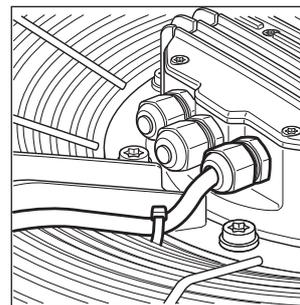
Fan installed lying flat (shaft vertical, rotor on bottom), cable routed as "water trap"
